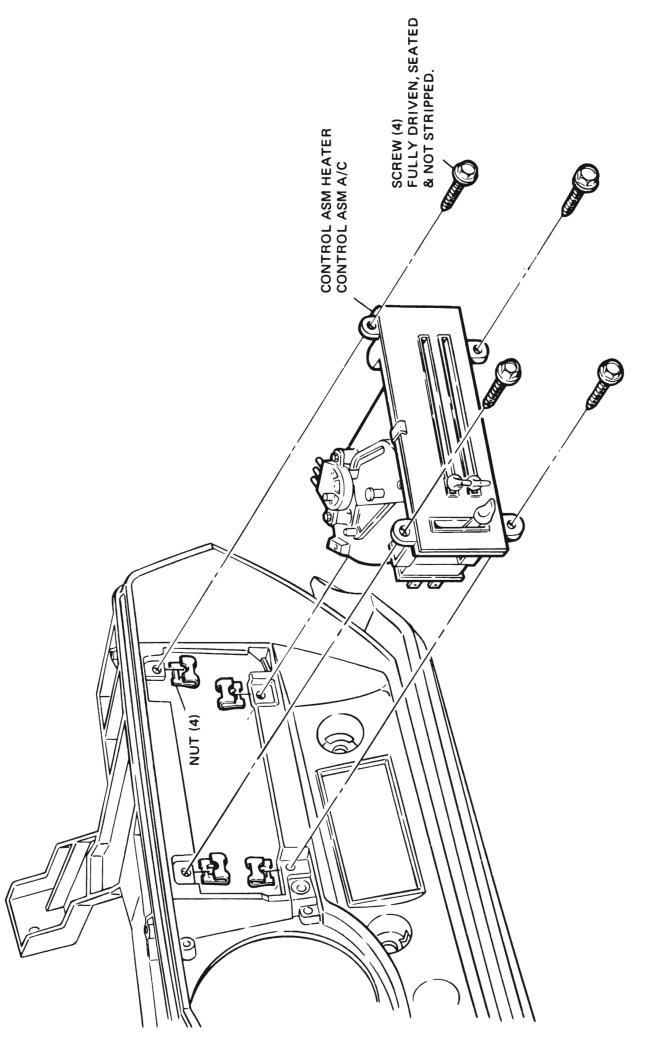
B-162 Heater and A/C to Housing Control Assembly - A Series
